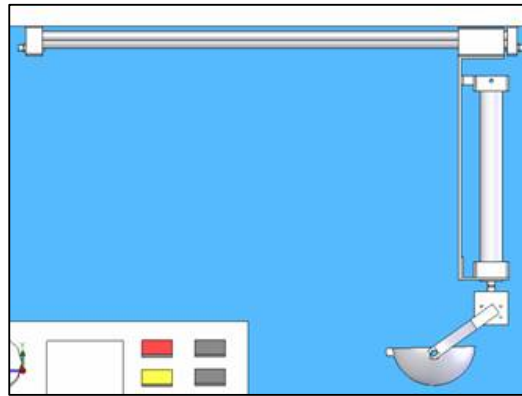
Automatic Pouring Design, (1) Rod less Cylinder, (2) Air Cylinder (3) Rotary Actuator.
